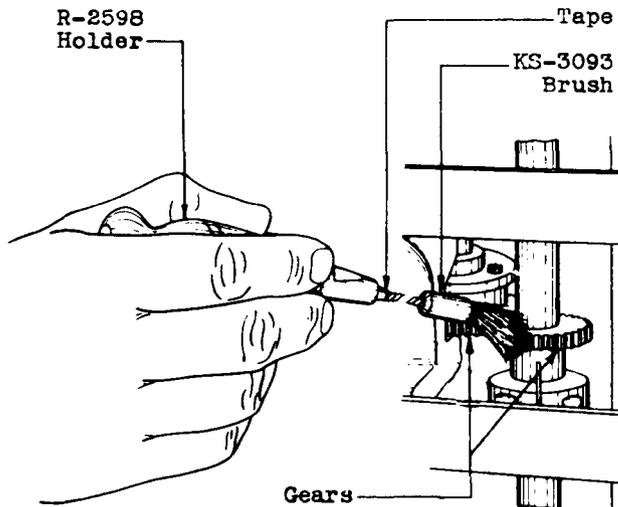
Cleaning and Lubricating Gear Teeth of Reciprocating Bar Type Interrupters
